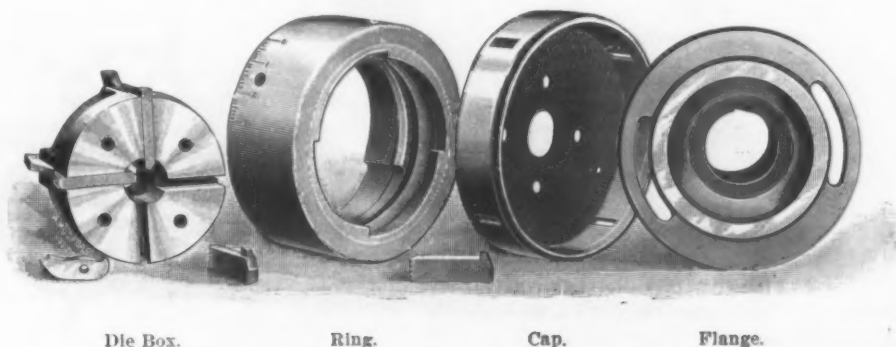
The Parts of the Head of the New Merriman Automatic Bolt Cutter.
